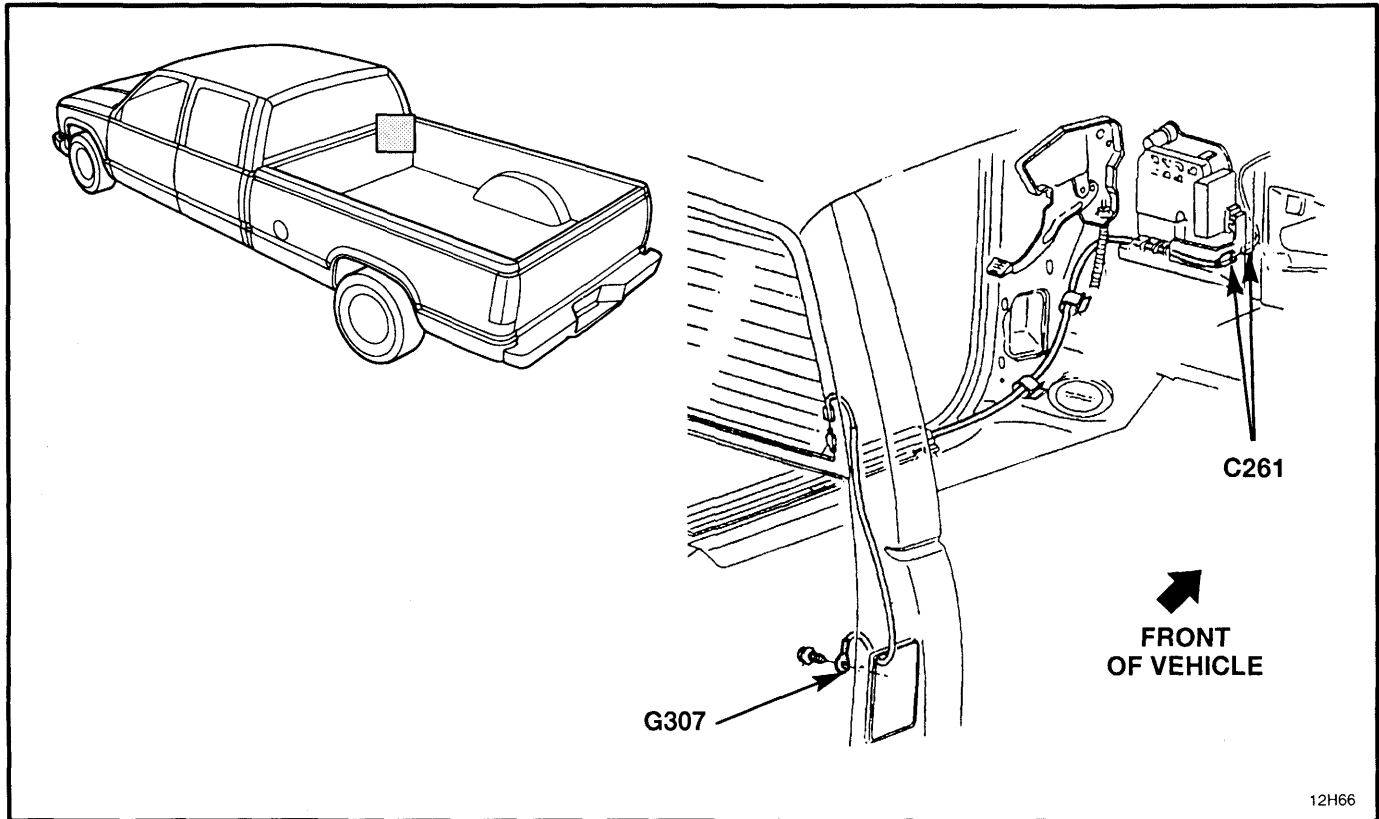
Rear Window Defogger Wiring, 4-Door Cab Shown — Pickup and Extended Cabs Similar
